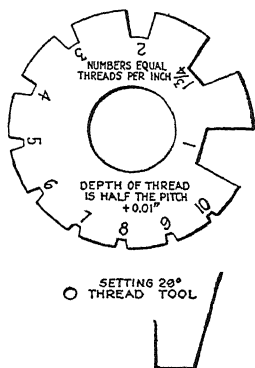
Gauges for grinding and setting Acme-thread tools.
